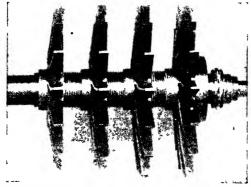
Four-stage radial-blade impeller rotor showing labyrinth rings on the shaft.
